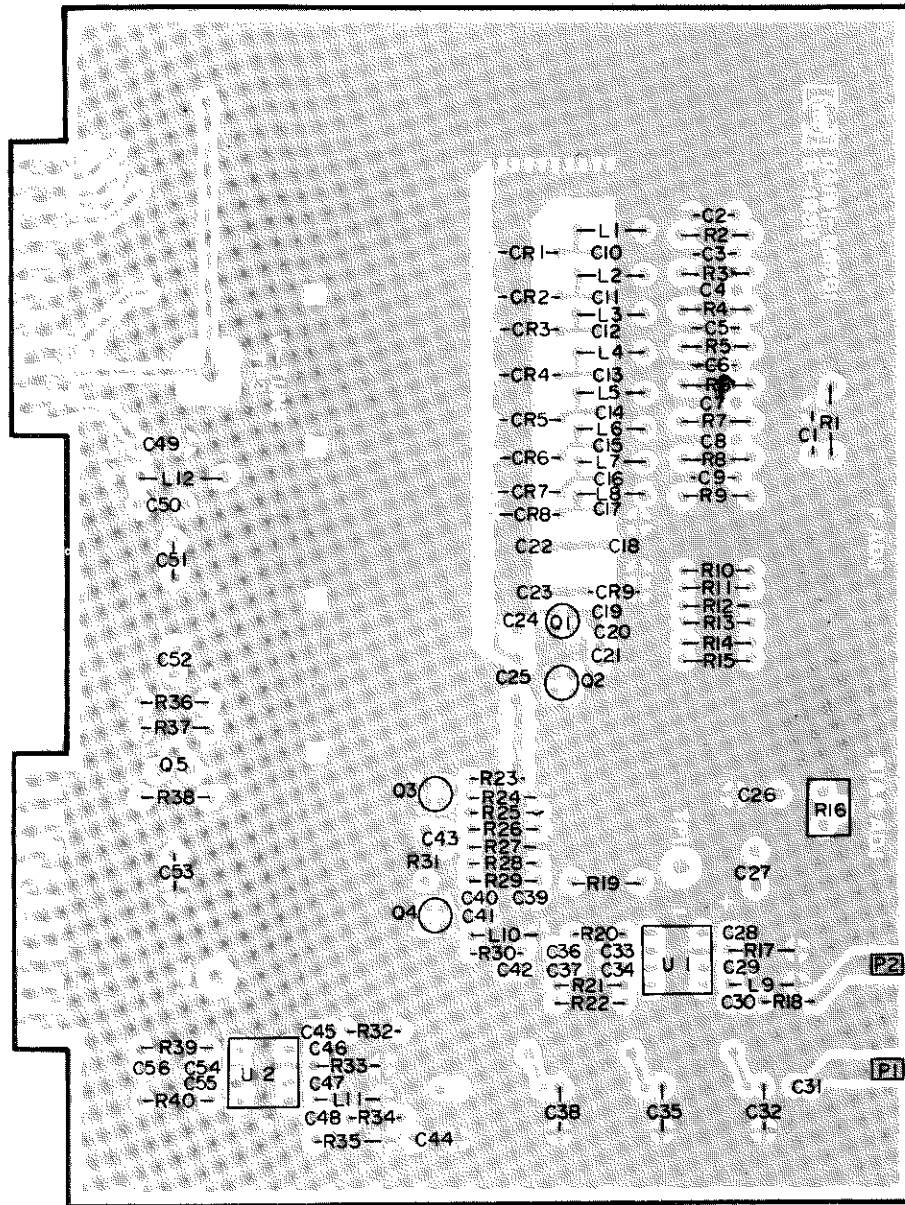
A1 VTO (250-500MHz) Board Assembly Component Locations.
